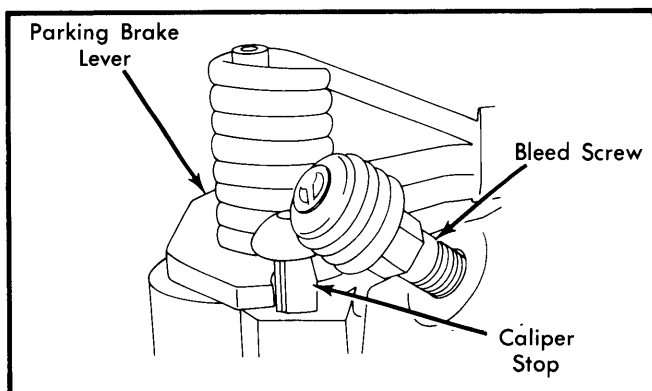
Turbo Rear Disc Brake Caliper Parking Brake Lever Resting Position
